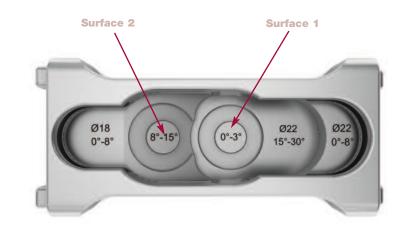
Assembly Surfaces of the VLIFT End Cap Remover.
